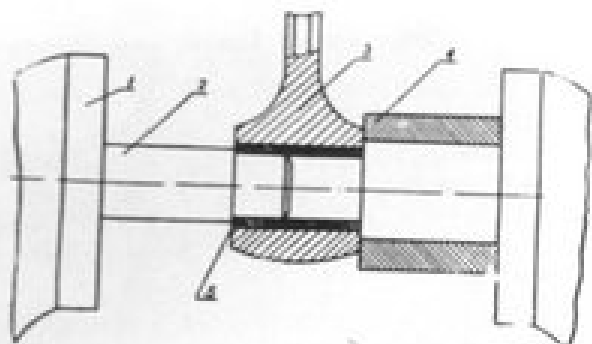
Pressing-out the connecting rod small end bush in vice:
